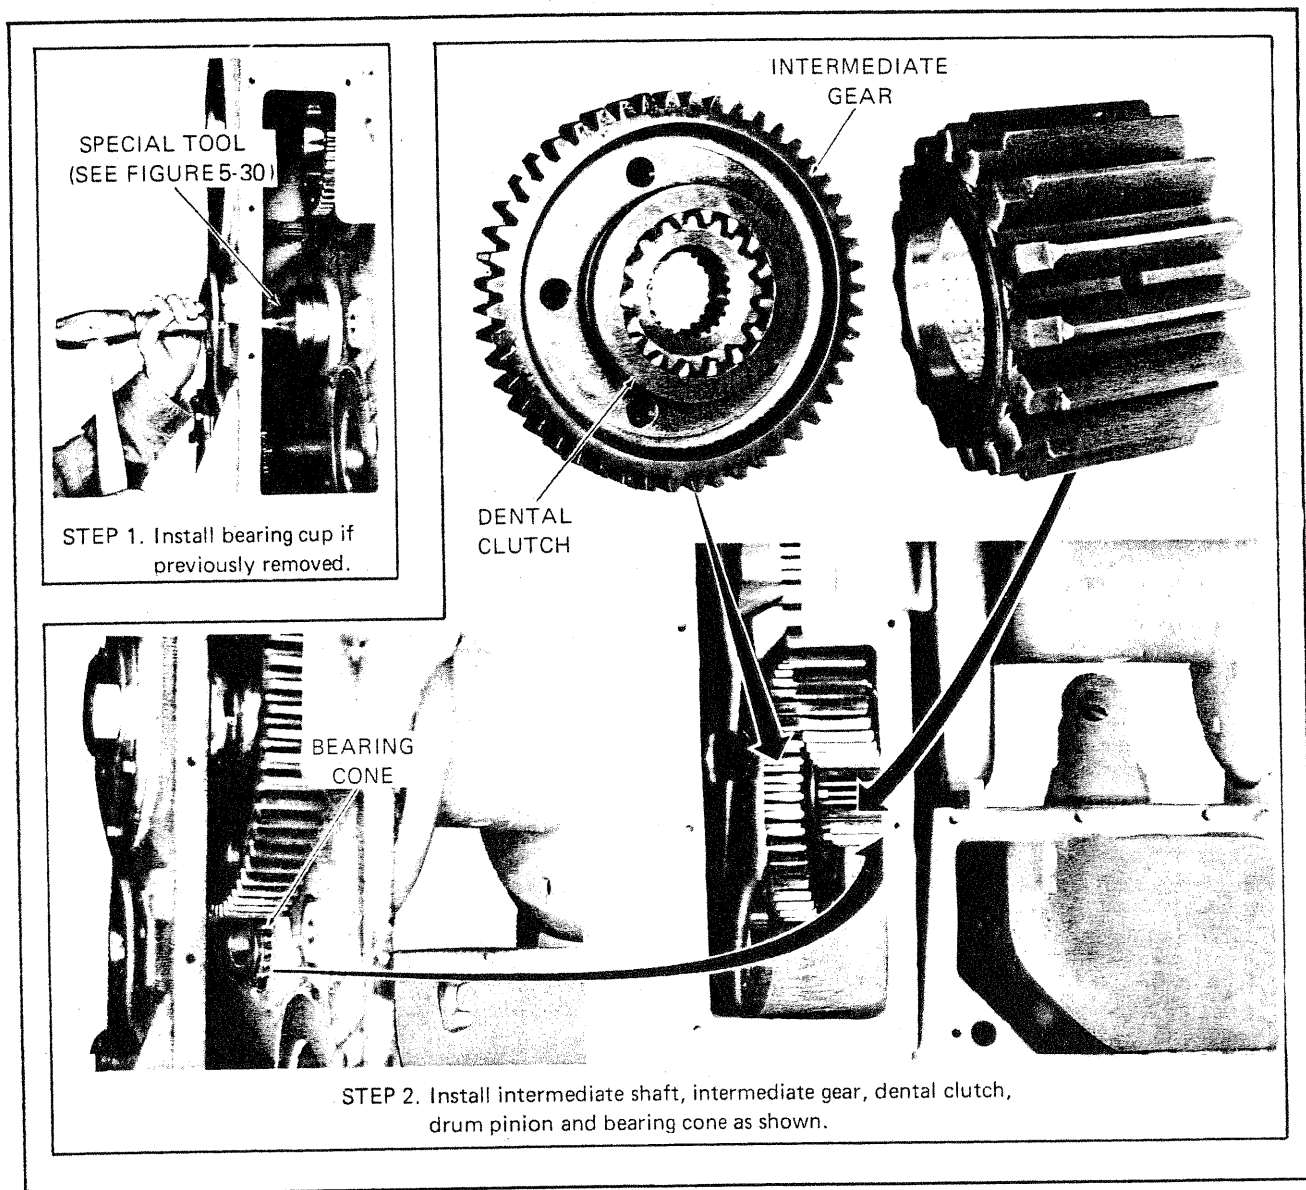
INSTALLATION OF INTERMEDIATE SHAFT ASSEMBLY FOR WINCH WITH FREE SPOOLING
